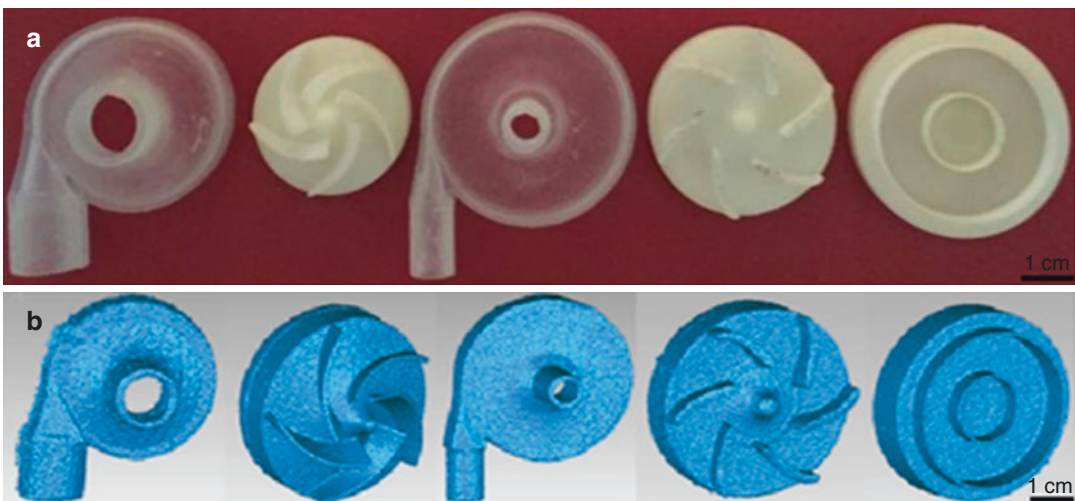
(a) Disassembled aortic-turbine venous-assist device in five parts, (b) reconstruction of the device after disassembly
